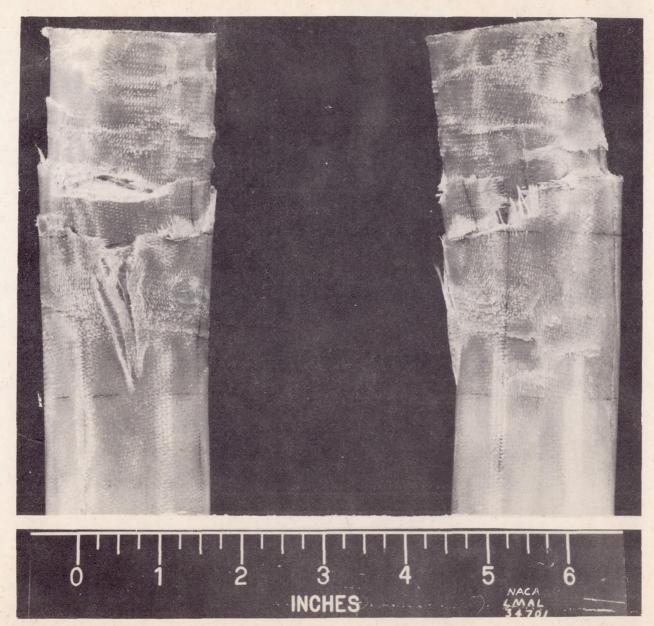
Front and side views of spirally wrapped unidirectionalweave-cloth specimen after failure.
